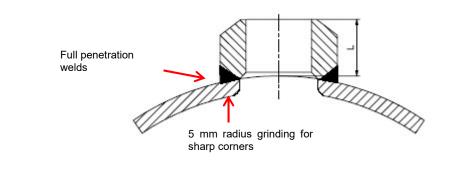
Branch connections shall always be connected with full penetration welds, so that no crevices are formed. Sharp corners shall be ground to 5 mm minimum radius.
